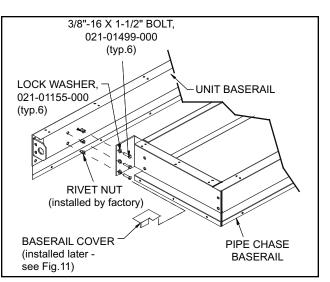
PIPE CHASE BASERAIL TO UNIT BASERAIL INSTALLATION (When Purchased)
